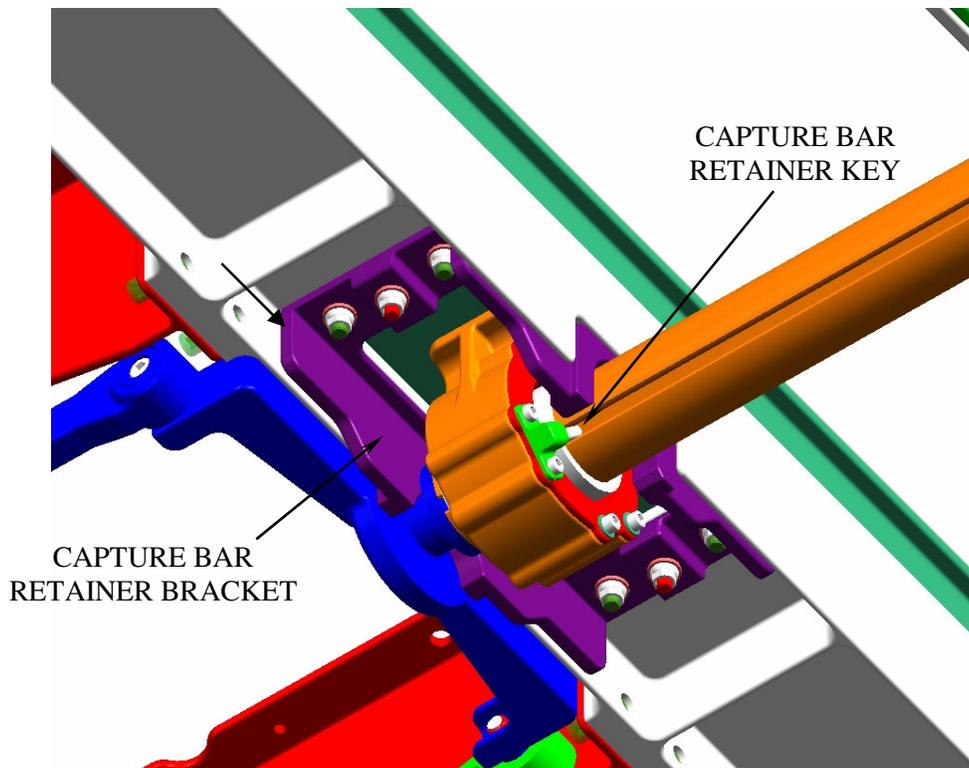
EVA Removable Capture Bar Assembly (2 of 2)
